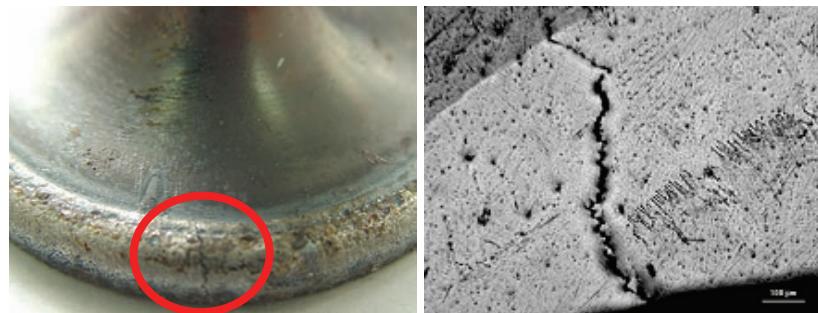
A crack in a padding weld made on a W-46 engine valve
